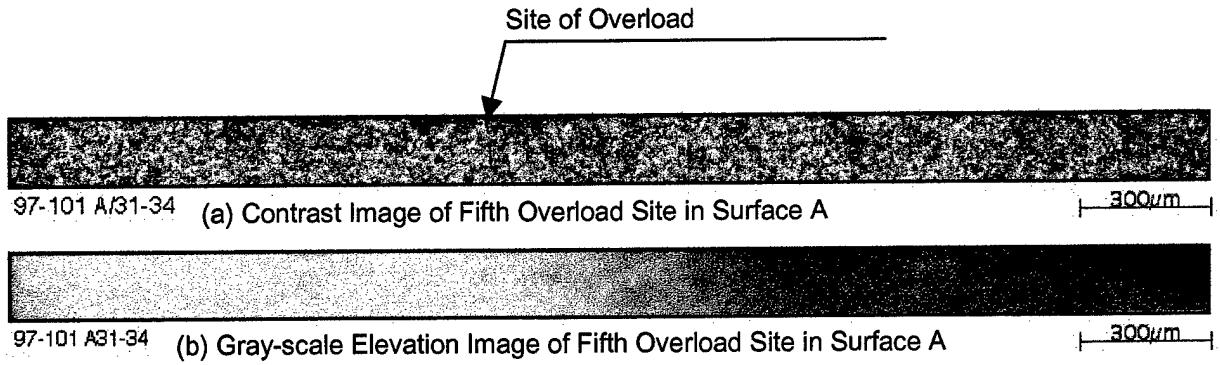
Contrast and gray-scale elevation images of fracture surface area surrounding overload site.
